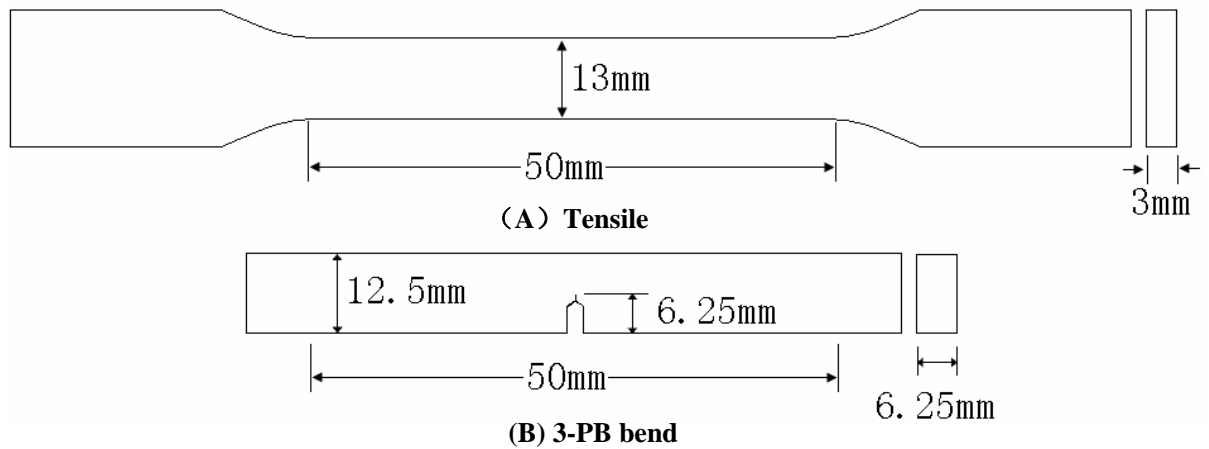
Specimen dimensions of (A) tensile and (B) 3-point bend tests.
